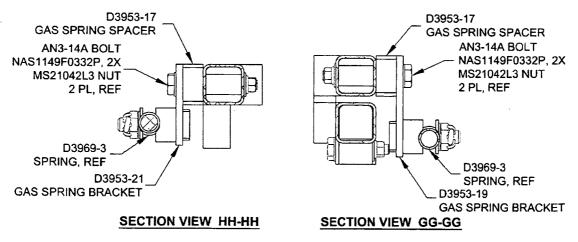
D2530 HANDLE & D3969-3 SPRING INSTALLATION DETAILS
